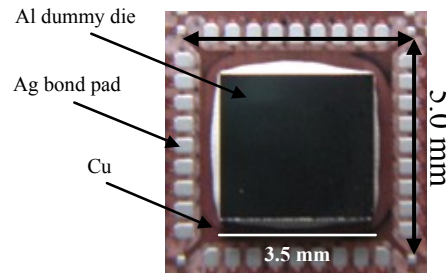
Top view of a piece of QFN FR0067 leadframe with Al-dummy die.
